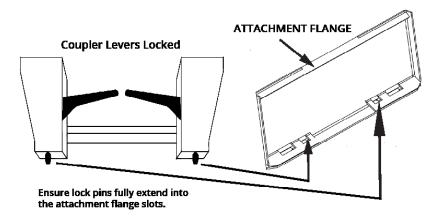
Quick Attach Mechanism Locked to Attachment Plate
